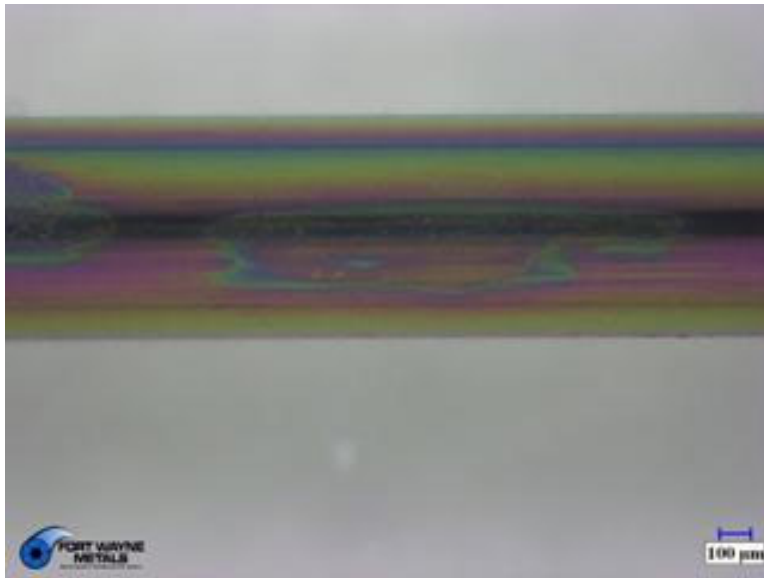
35N LT® DFT®-41Ag Masked Surface After Corrosion Test
